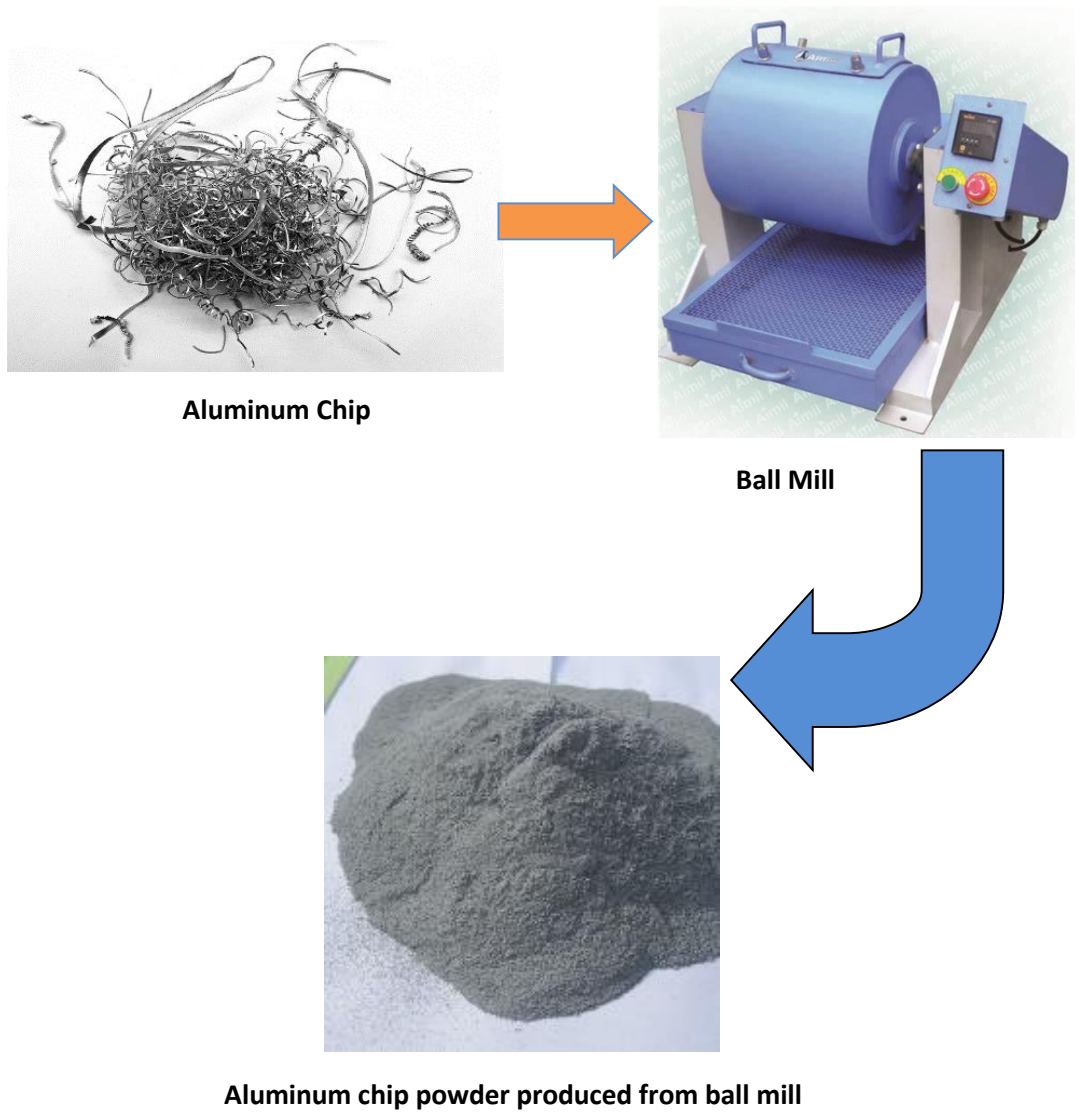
Aluminum machining chip milling by Ball mill to produce the aluminum powder.
